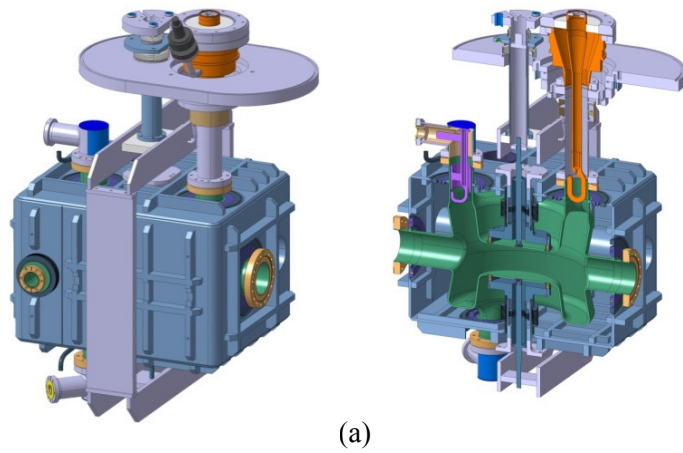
(a) The DQW cavity inside its helium tank with the field probe port (front), beam port (right) and tuner frame around. (b) Sectional view of the DQW cavity inside its helium tank with the power coupler (top right, orange), HOM coupler (left, top and bottom), and tuner (centre, top, and bottom).
